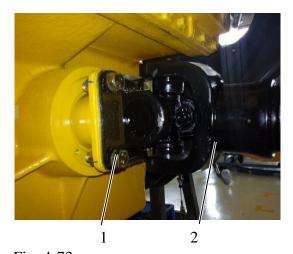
1 Hexagon bolt 2 Rear transmission shaft
